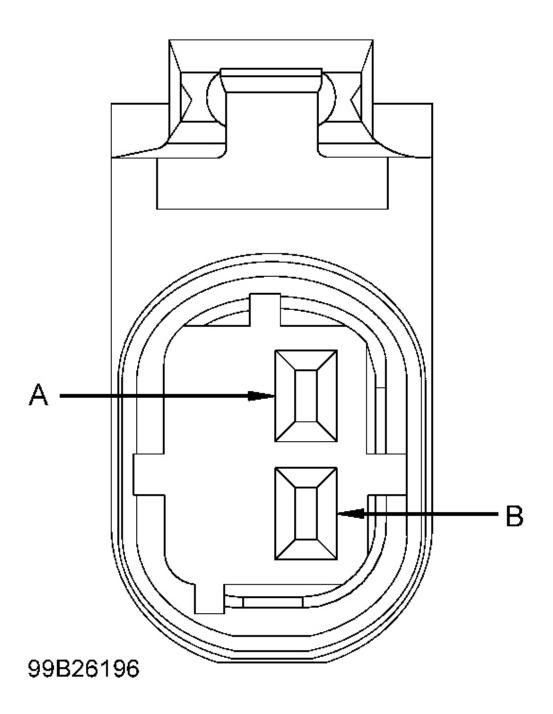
Identifying Driver-side & Passenger-side Air Bag Module Connector Terminals Courtesy of ISUZU MOTOR CO.
